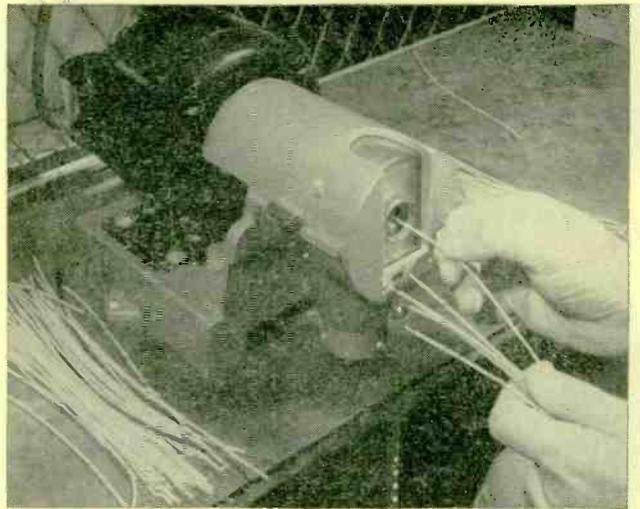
Use of a torch in soldering operation. Operator is assembling variable air-dielectric capacitors
